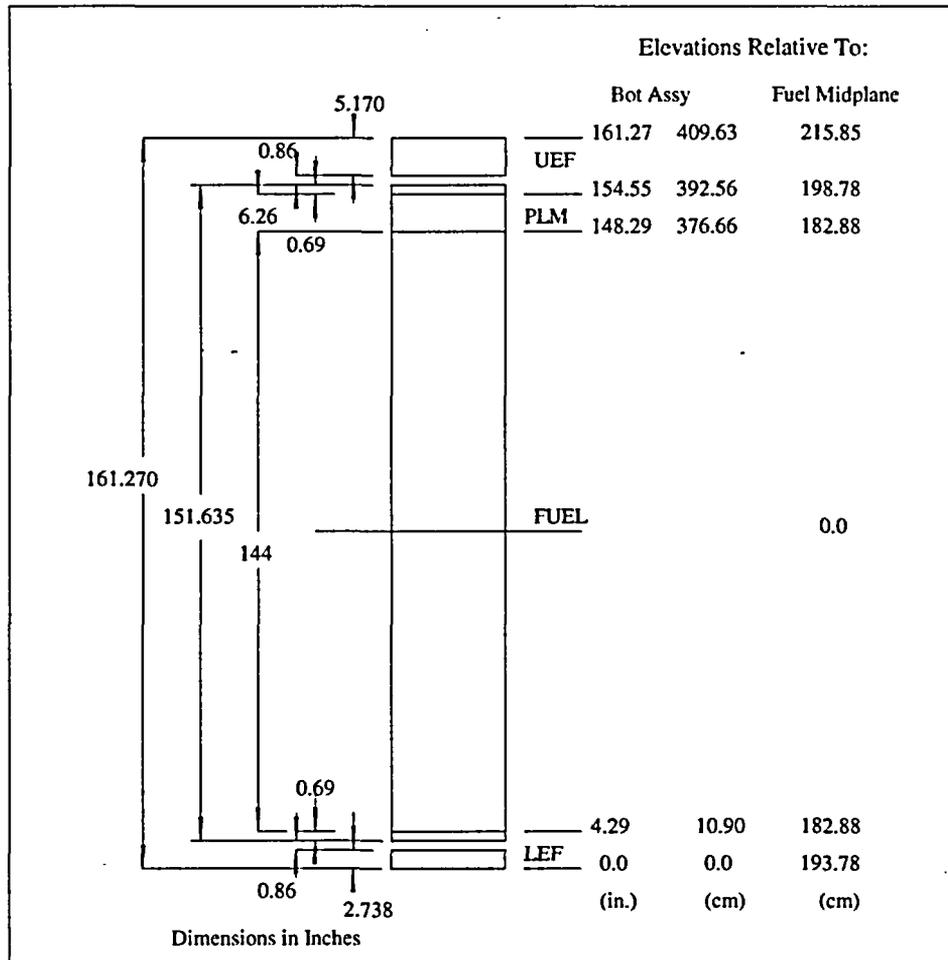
WE 17x17 Assembly Geometrical Parameters
